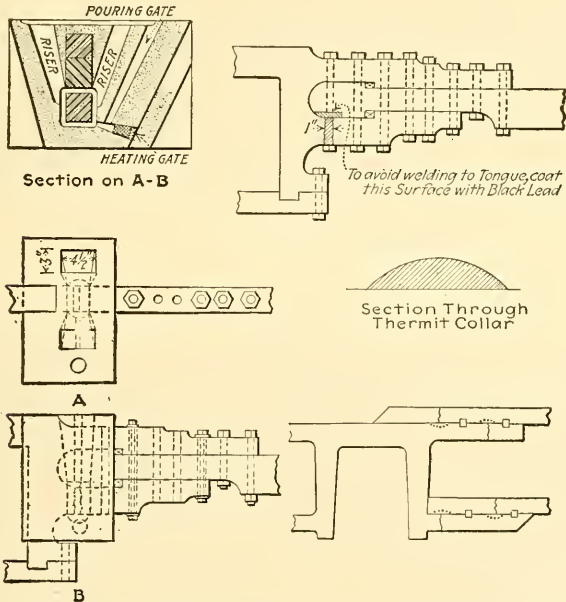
Method of Welding Frames Broken in Splice. Lower Drawing Shows How to Drill and Cut the Unbroken Member.
